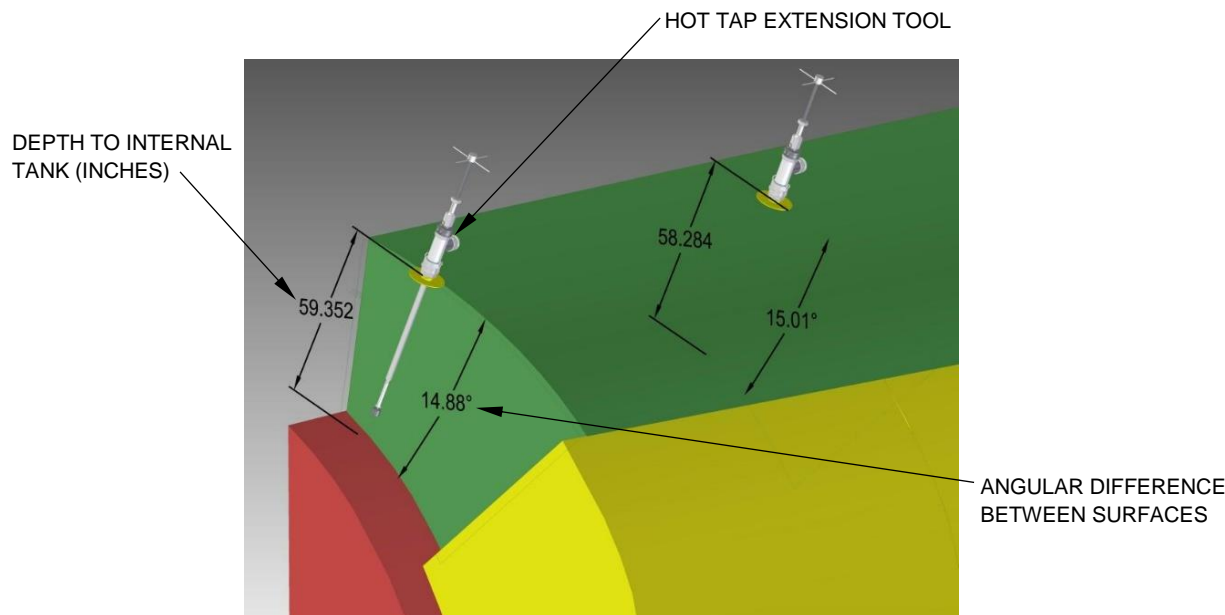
Representation of Hot Tap Extension Tool Installed on the Ship Hull Model (Section IV)
